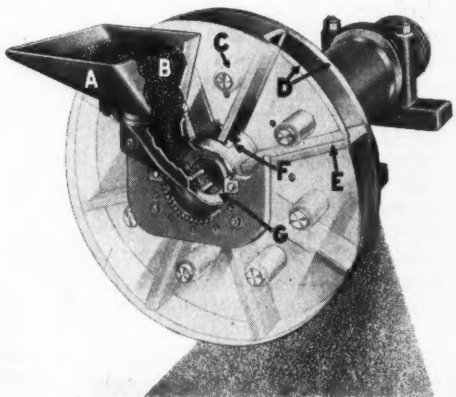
Phantom view of the Airless Wheelabrator. Key to Parts: A—Shot funnel; B—Shot; C—Spacers between side plates; D—Special steel side plates; E—Cast alloy blades (removable); F—Cast alloy control cage (Stationary in Operation). Change in direction of blast stream can be obtained by turning the control cage, which changes the position of the opening. G—Cast alloy impeller. (Rotates with Wheel).
